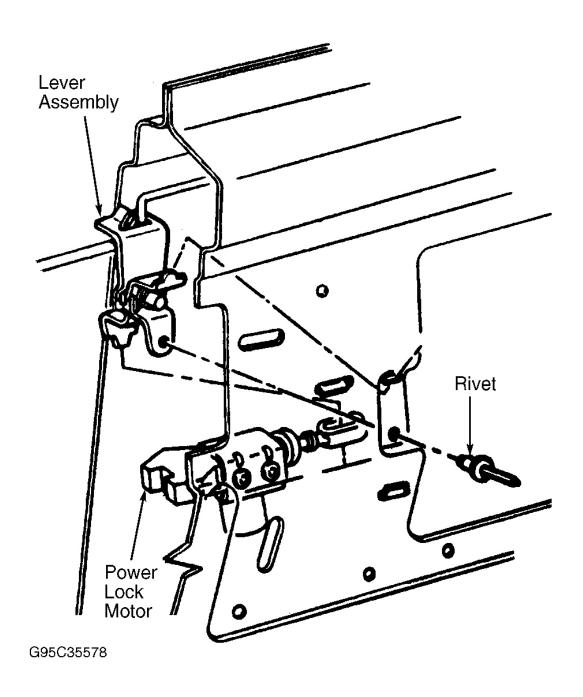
Removing Side Door Lock Motor (Typical) Courtesy of GENERAL MOTORS CORP.
